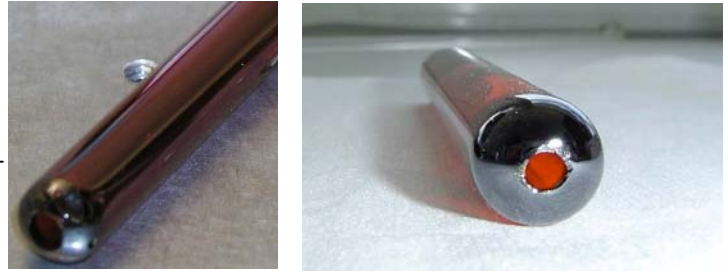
Chalcogenide glass tubes obtained by rotational casting
